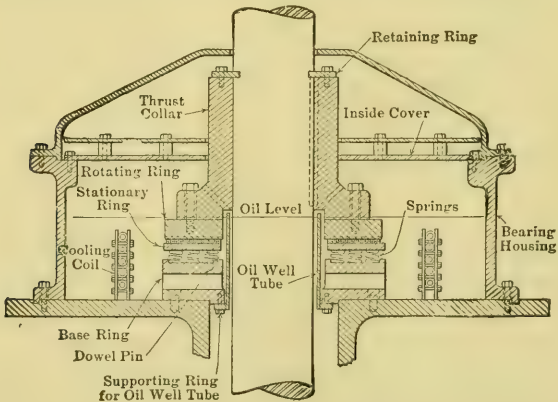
Cross-section through a Spring Thrust Bearing.
